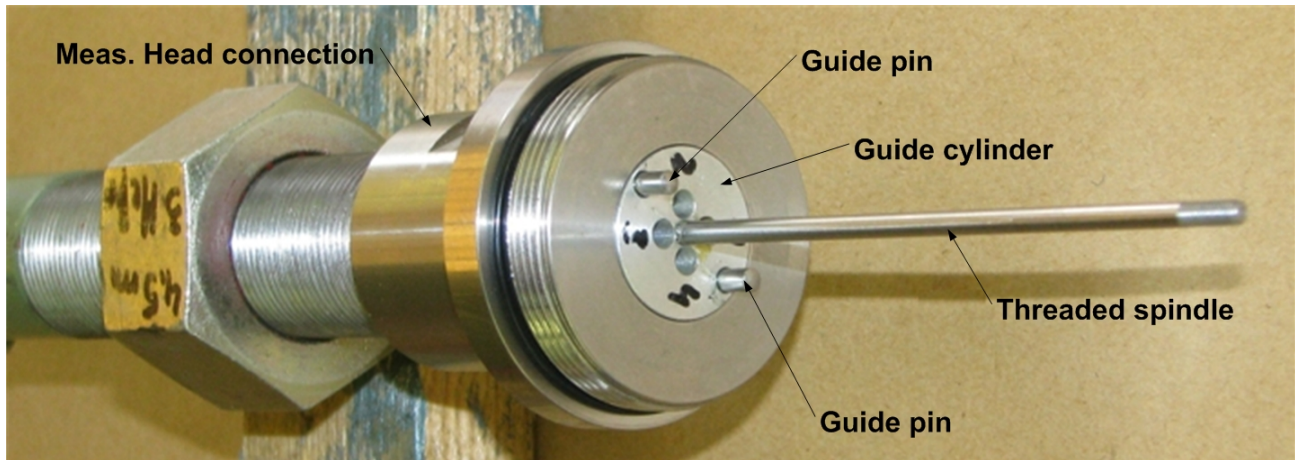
Measuring head connection with guide cylinder and threaded spindle before assembly
